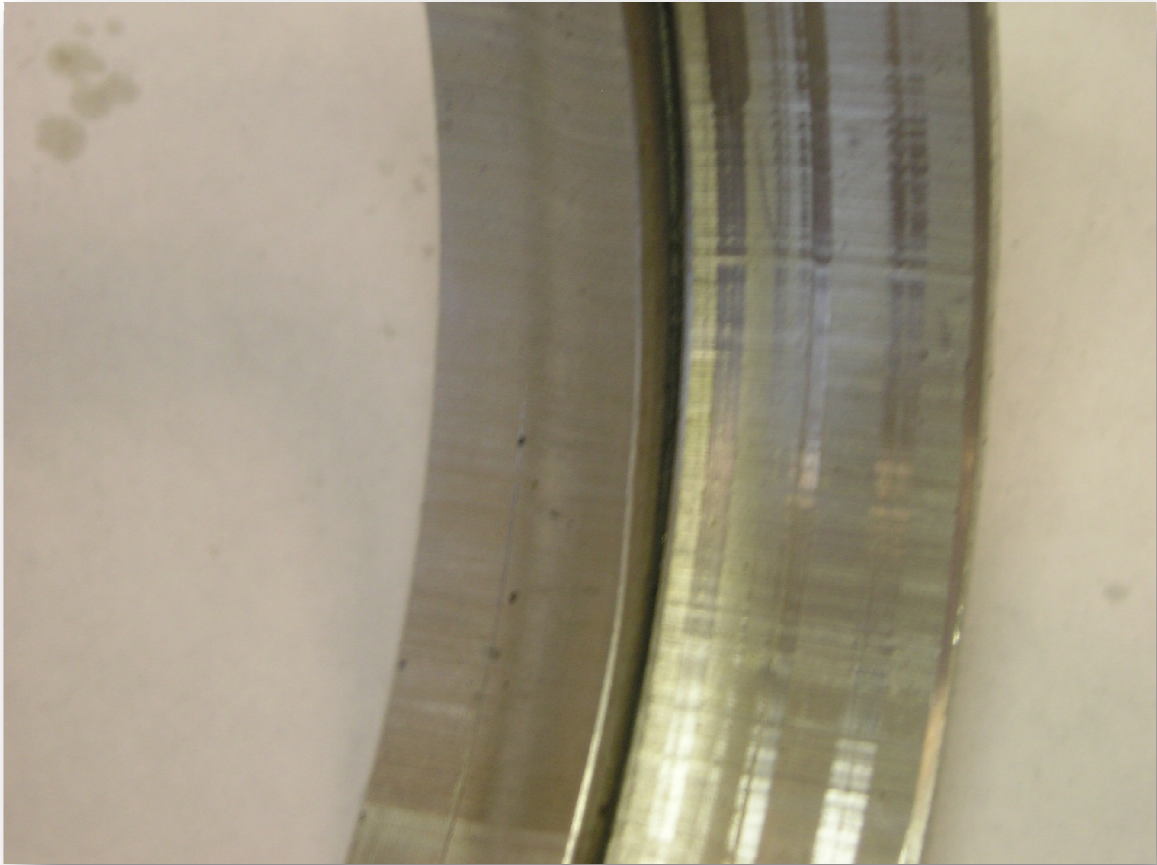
Split protrusion type defect experienced in cupped shoulder ($\text{\O} 5/8''$), threaded probe ($\text{\O} 0.20''$) welds made without a backing ring anvil at 50% material penetration in a butt weld configuration. This defect was present at all tested parameters with this weld depth and tooling. The unsupported portion of the experiment was therefore performed with a shoulder-less, conical tool. The conical tool experienced no visible deformation at the weld root at this weld depth over the parameters tested in butted configuration welds. (\O = diameter)
